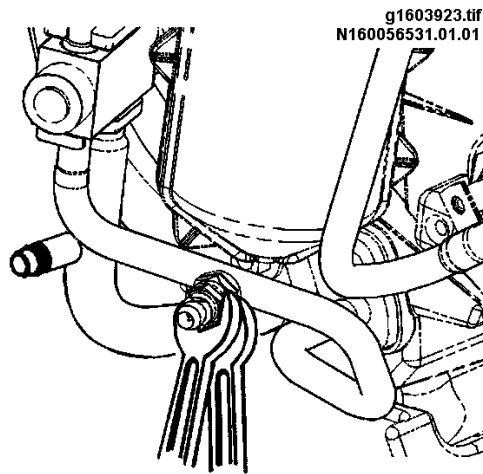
Use a Back-Up Wrench When Loosening or Tightening Fittings
